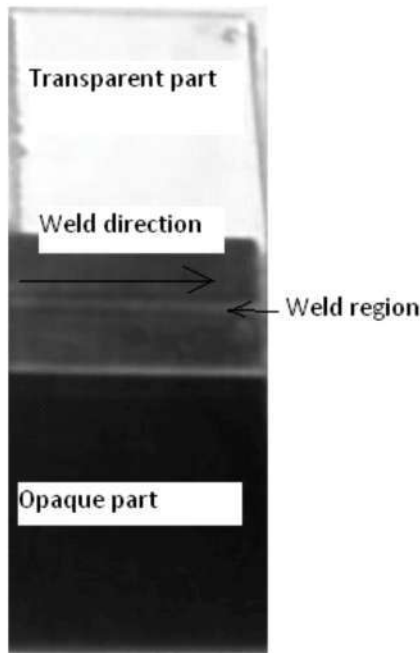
Typical plastic laser welded specimen (No. 13)
